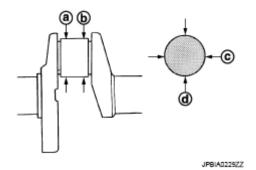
Identifying Crankshaft Out-Of-Round And Taper Dimensions Courtesy of NISSAN MOTOR CO., U.S.A.
